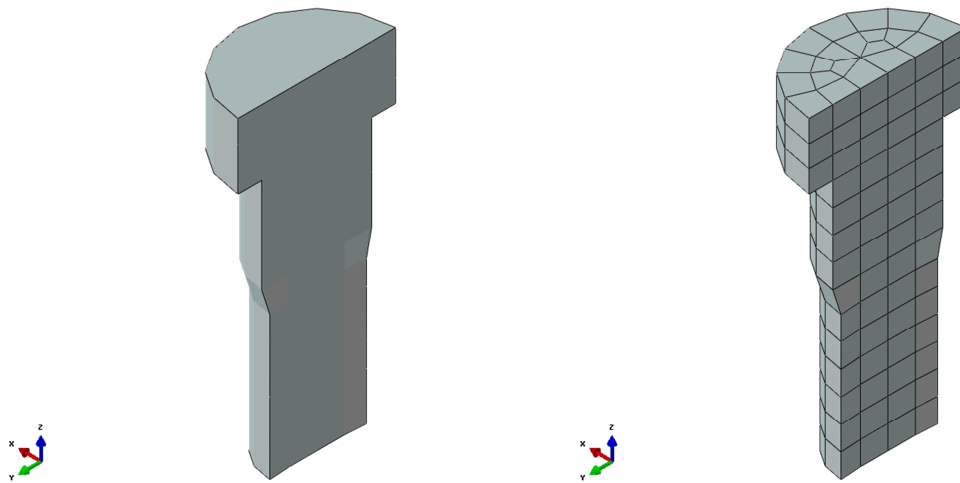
Screw geometry (left), and mesh (right) – used to fix the insert lid to the insert.
